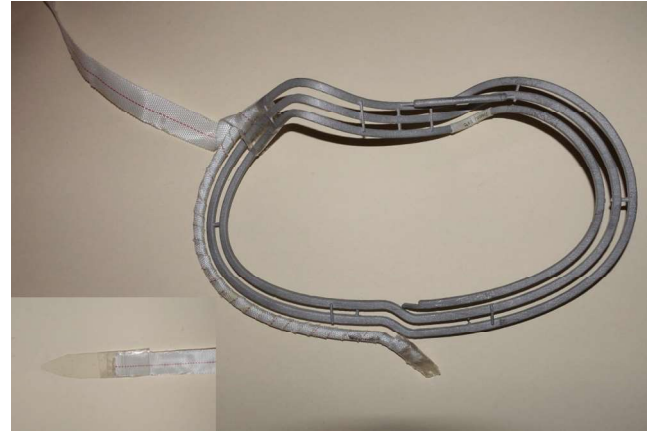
Test of insulation on the SLM Al-Si winding. Needle-like end of insulation for faster winding (bottom left).
